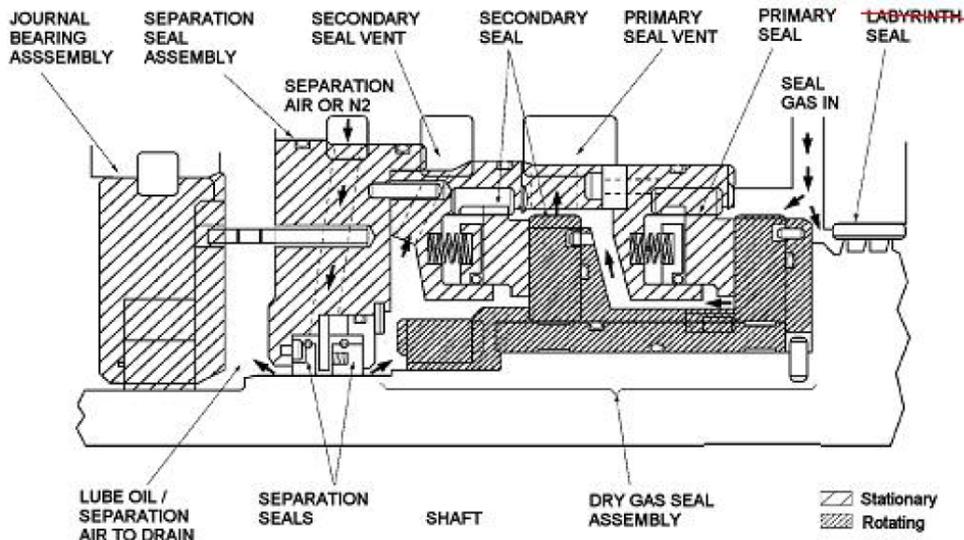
shows a typical gas turbine compressor set and centrifugal gas compressor. Centrifugal gas compressors contain internal seal mechanisms installed around the rotating shaft which are pressurized to contain the process gas and prevent its escape from where the shaft exits the compressor case. Modern centrifugal gas compressors utilizing dry gas seals (DGS) emit small amounts of methane (process gas) as an inherent function of operation. DGS assemblies contain primary and secondary face seals which are installed in the compressor end caps. The primary seal is exposed to high-pressure seal gas (from an external supply) on one side and atmospheric pressure on the other. This seal provides the primary sealing function for the process gas. A small portion of the primary seal gas leaks across the seal and is routed to a vent to atmosphere. This primary seal vent is the point source of the gas compressor emissions. Figure 2 shows a simplified cutaway of the shaft and sealing mechanism.
